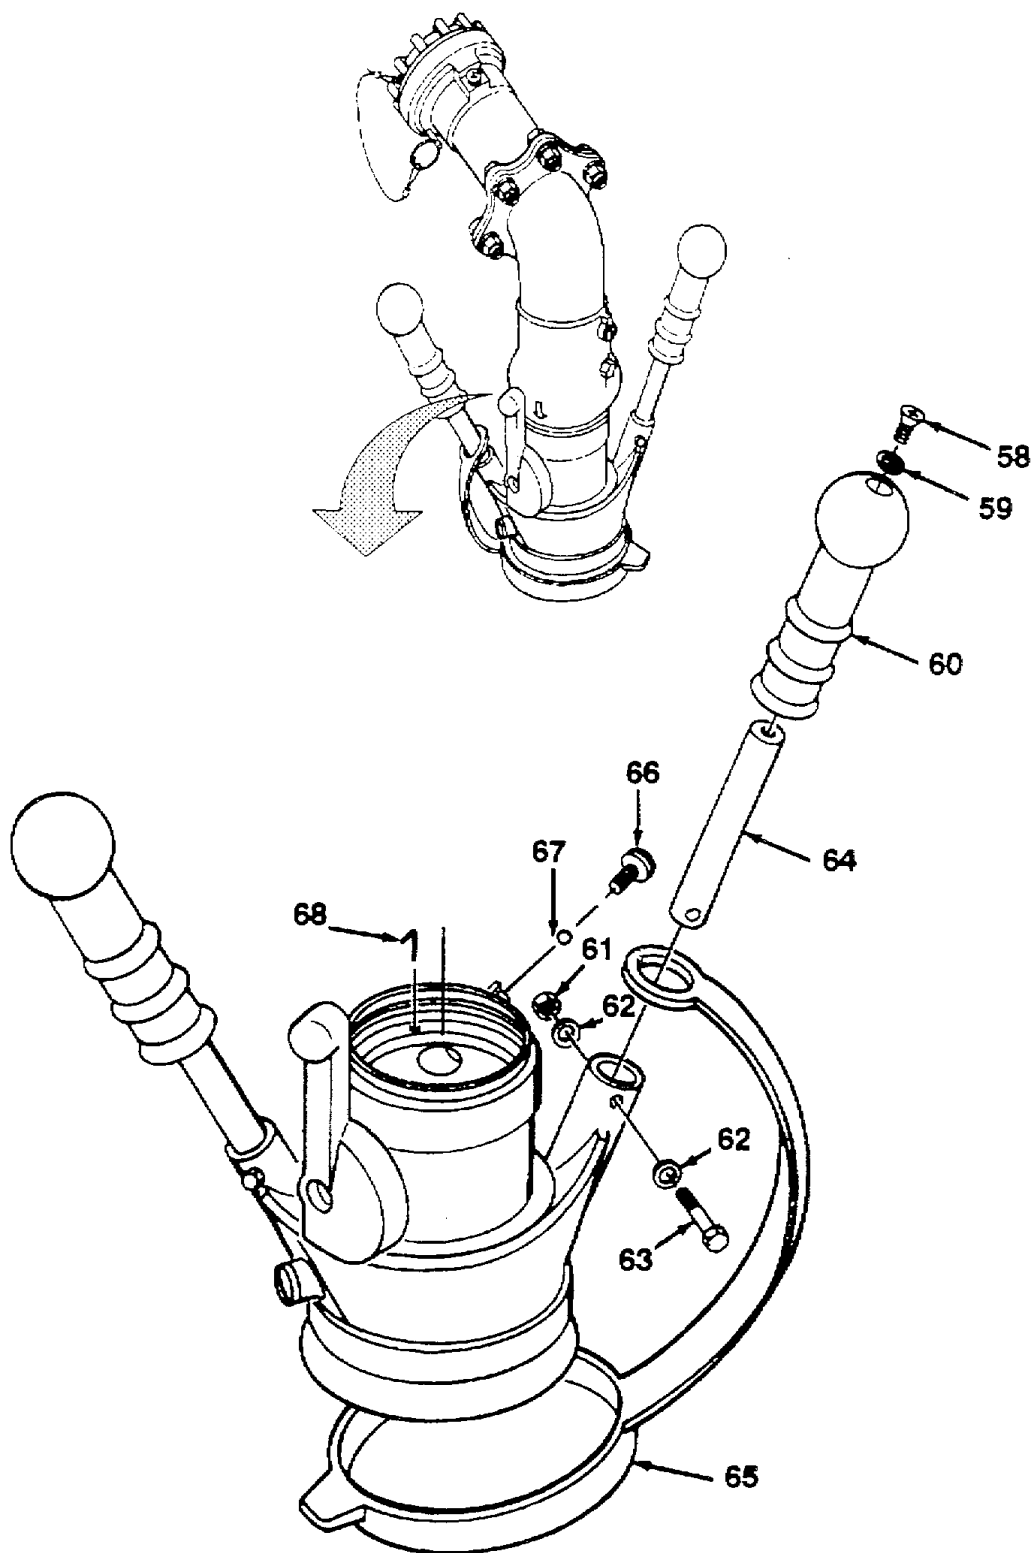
A. Pressure Fueling Nozzle Assembly (HTARS101) (Sheet 5 of 6)
